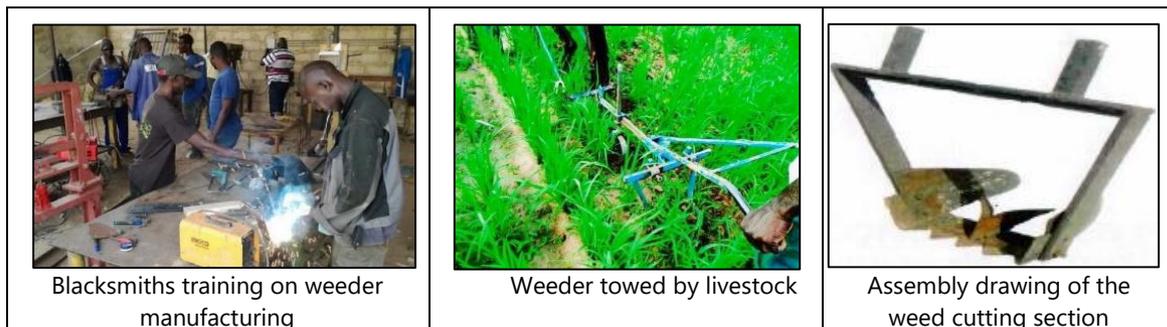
Manufacturing training, weeding work, and assembly drawing of improved weeder for blacksmiths
